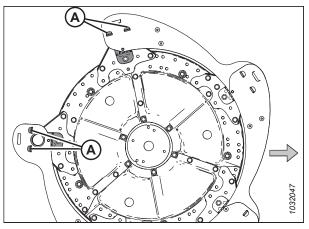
Reel Endshield Removed – Inboard Cam End
